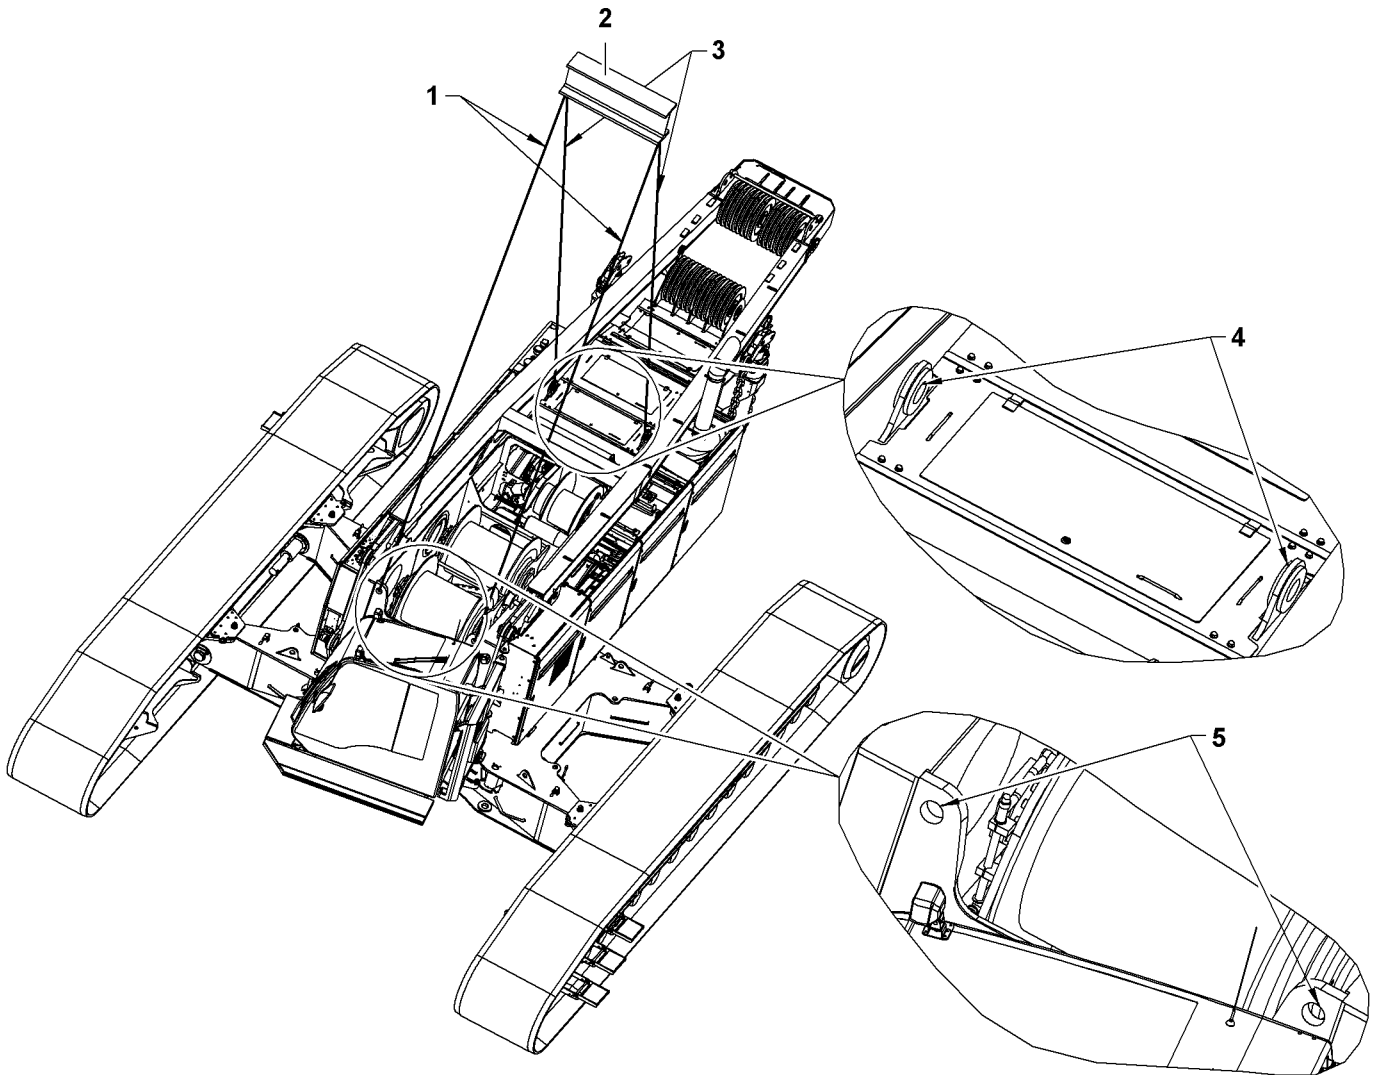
Loading the basic machine with crawler side frame - lifting points
